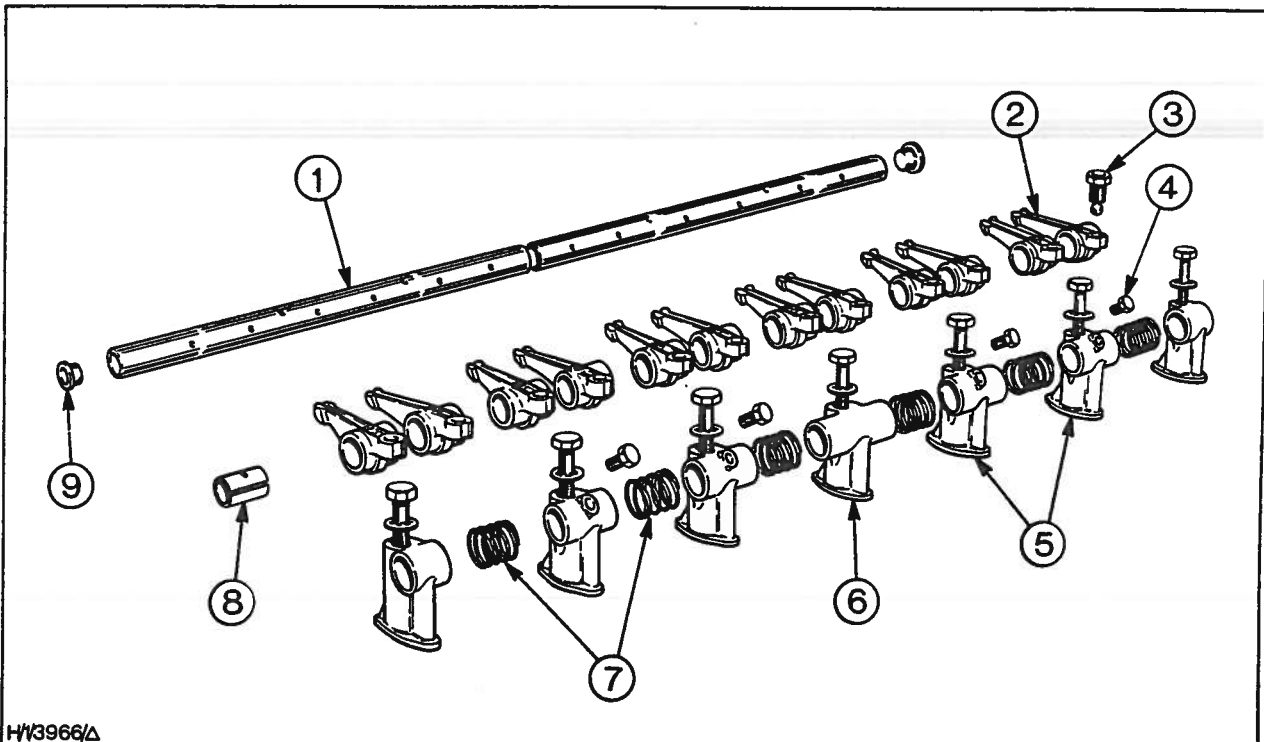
Rocker Shaft Assembly Exploded - 6 Cylinder Engines
